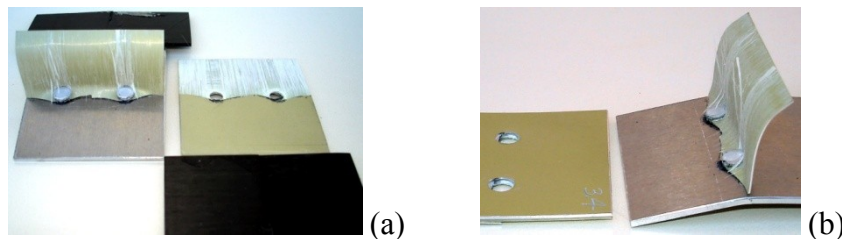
GI-Al joint fatigued-tested by [4]. (a) Frontal view; (b) Lateral view.
